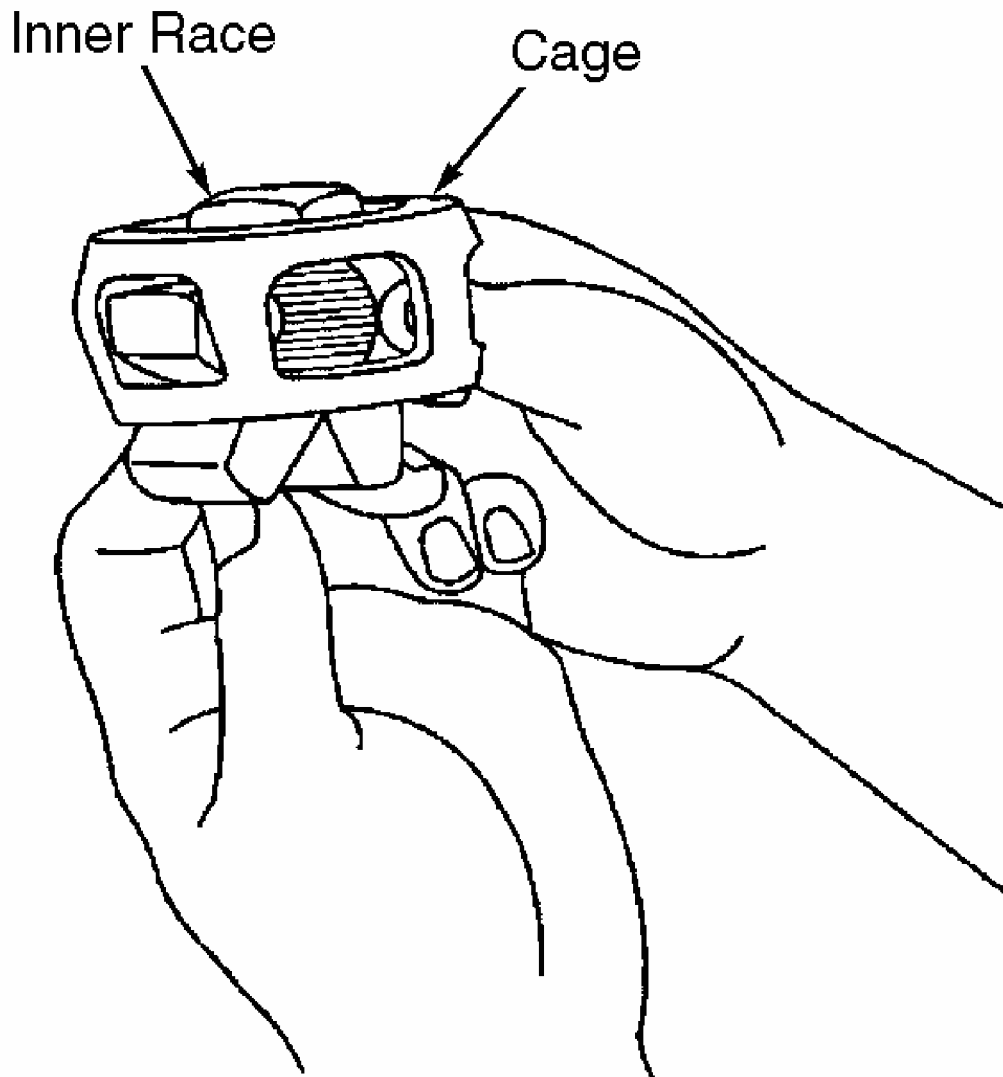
Exposing Outer CV Joint Ball Bearing For Removal
